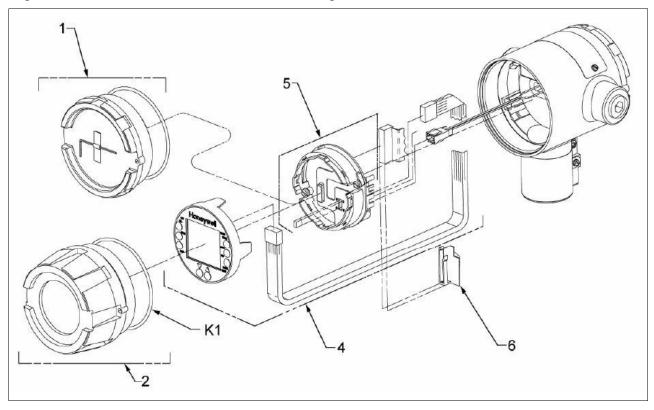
Series 100/900 Electronics Housing - Terminal Block End
